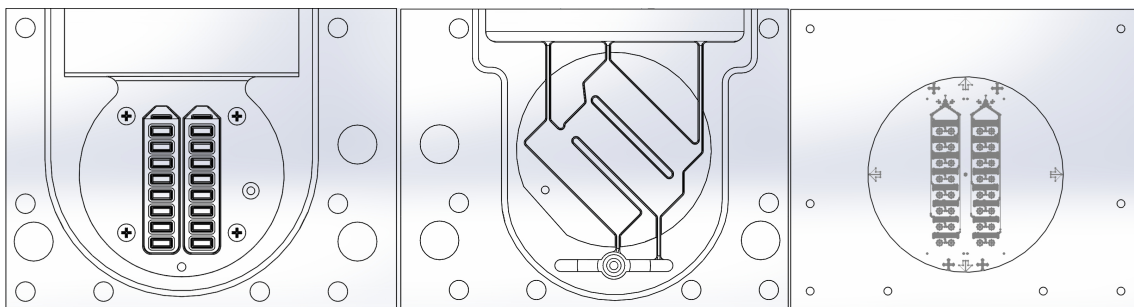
Big multifunctional pipette mold system: front design, back design and back plate design with master
